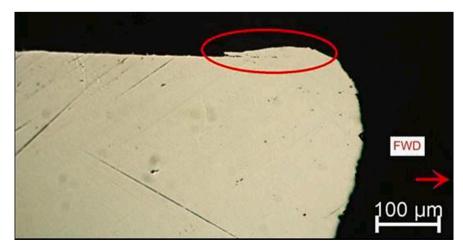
Fibrous Dimensions Caused by the Burr due Manufacturing Defect.
